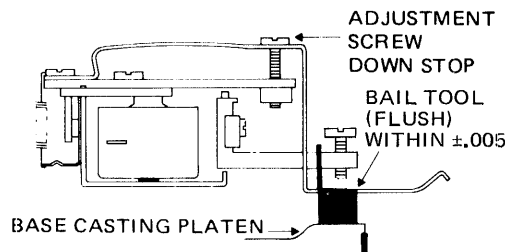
HEAD LOAD ACTUATOR DOWN STOP ADJUSTMENT
